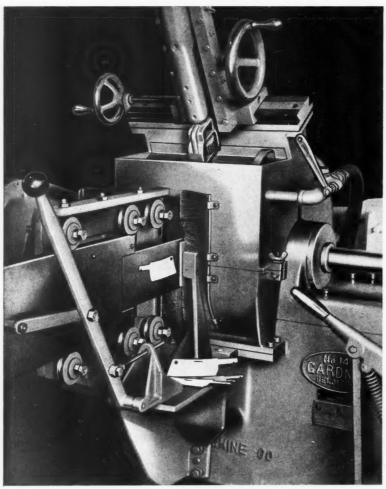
A roller gun type fixture is employed to oscillate meat cleavers between the opposed abrasive discs of this grinder
